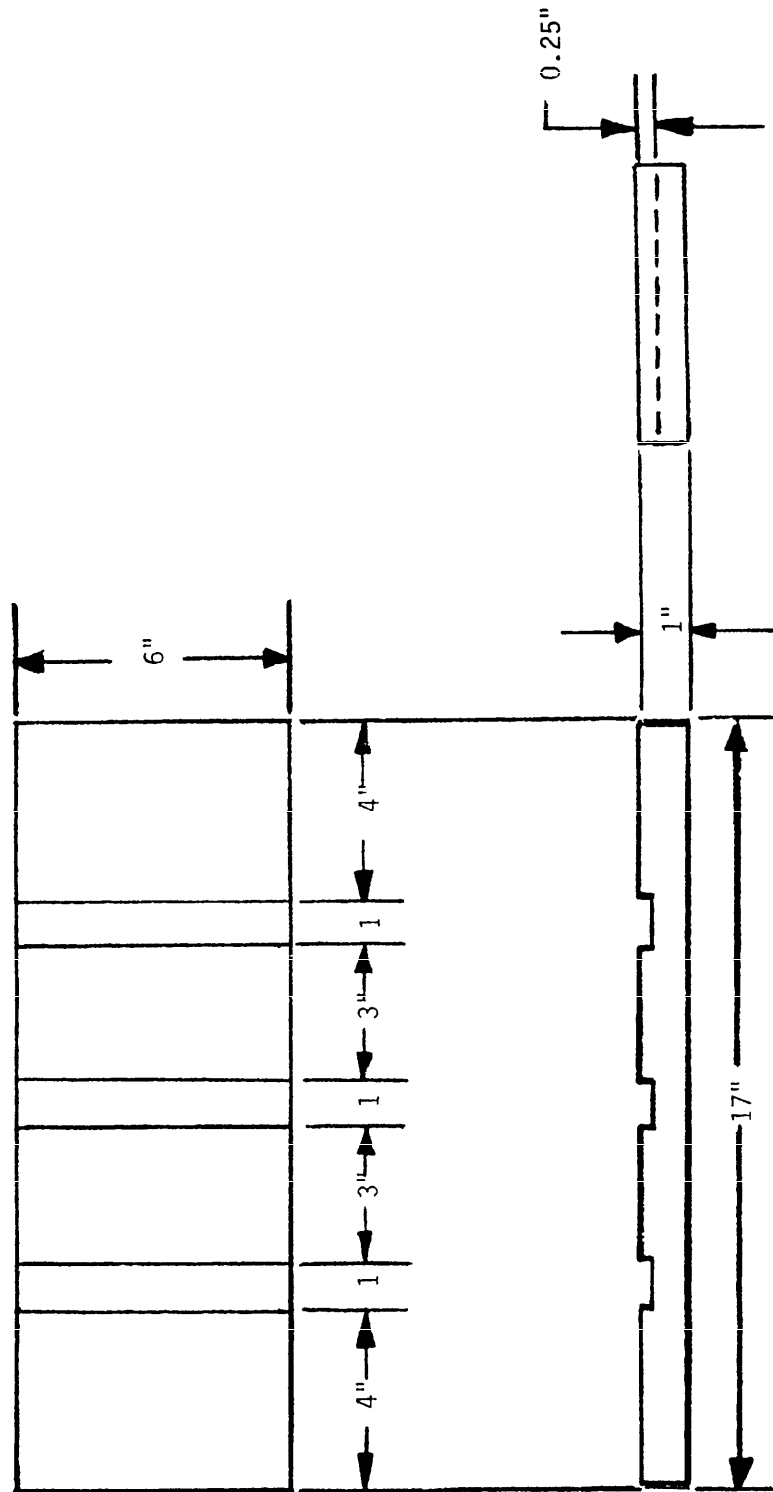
ALUMINUM TEST PANEL HOLDER
